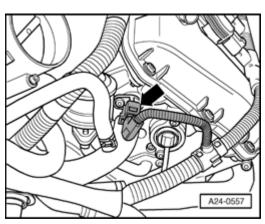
Disconnecting Electrical Harness Connector For Camshaft Position (CMP) Sensor G40 On Right Cylinder Head
